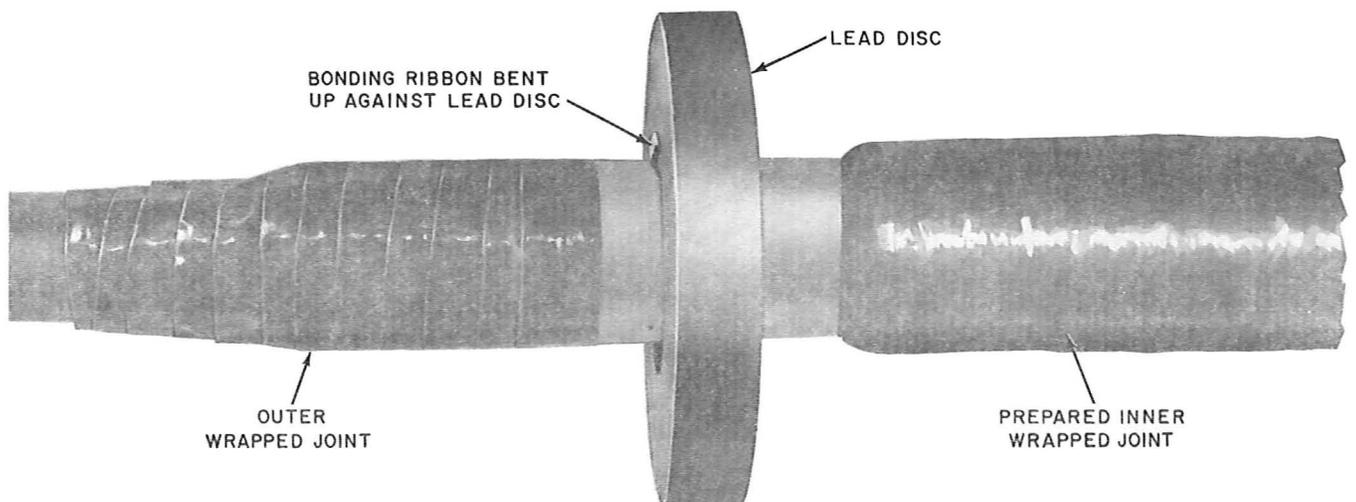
Method of Securing Bonding Ribbon When Lead Disc is Used
